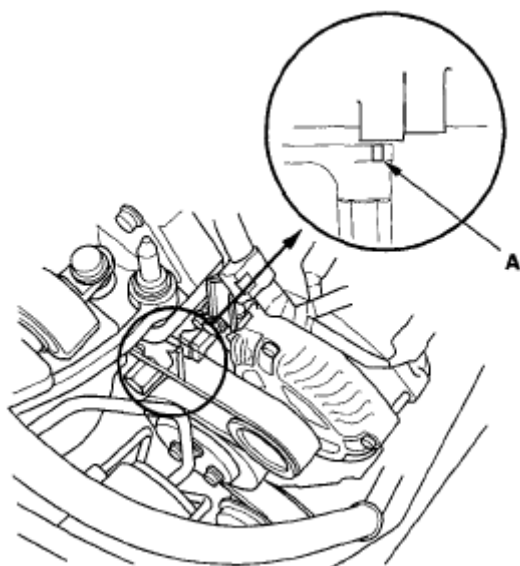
Identifying Drive Belt Auto-Tensioner Inspection
